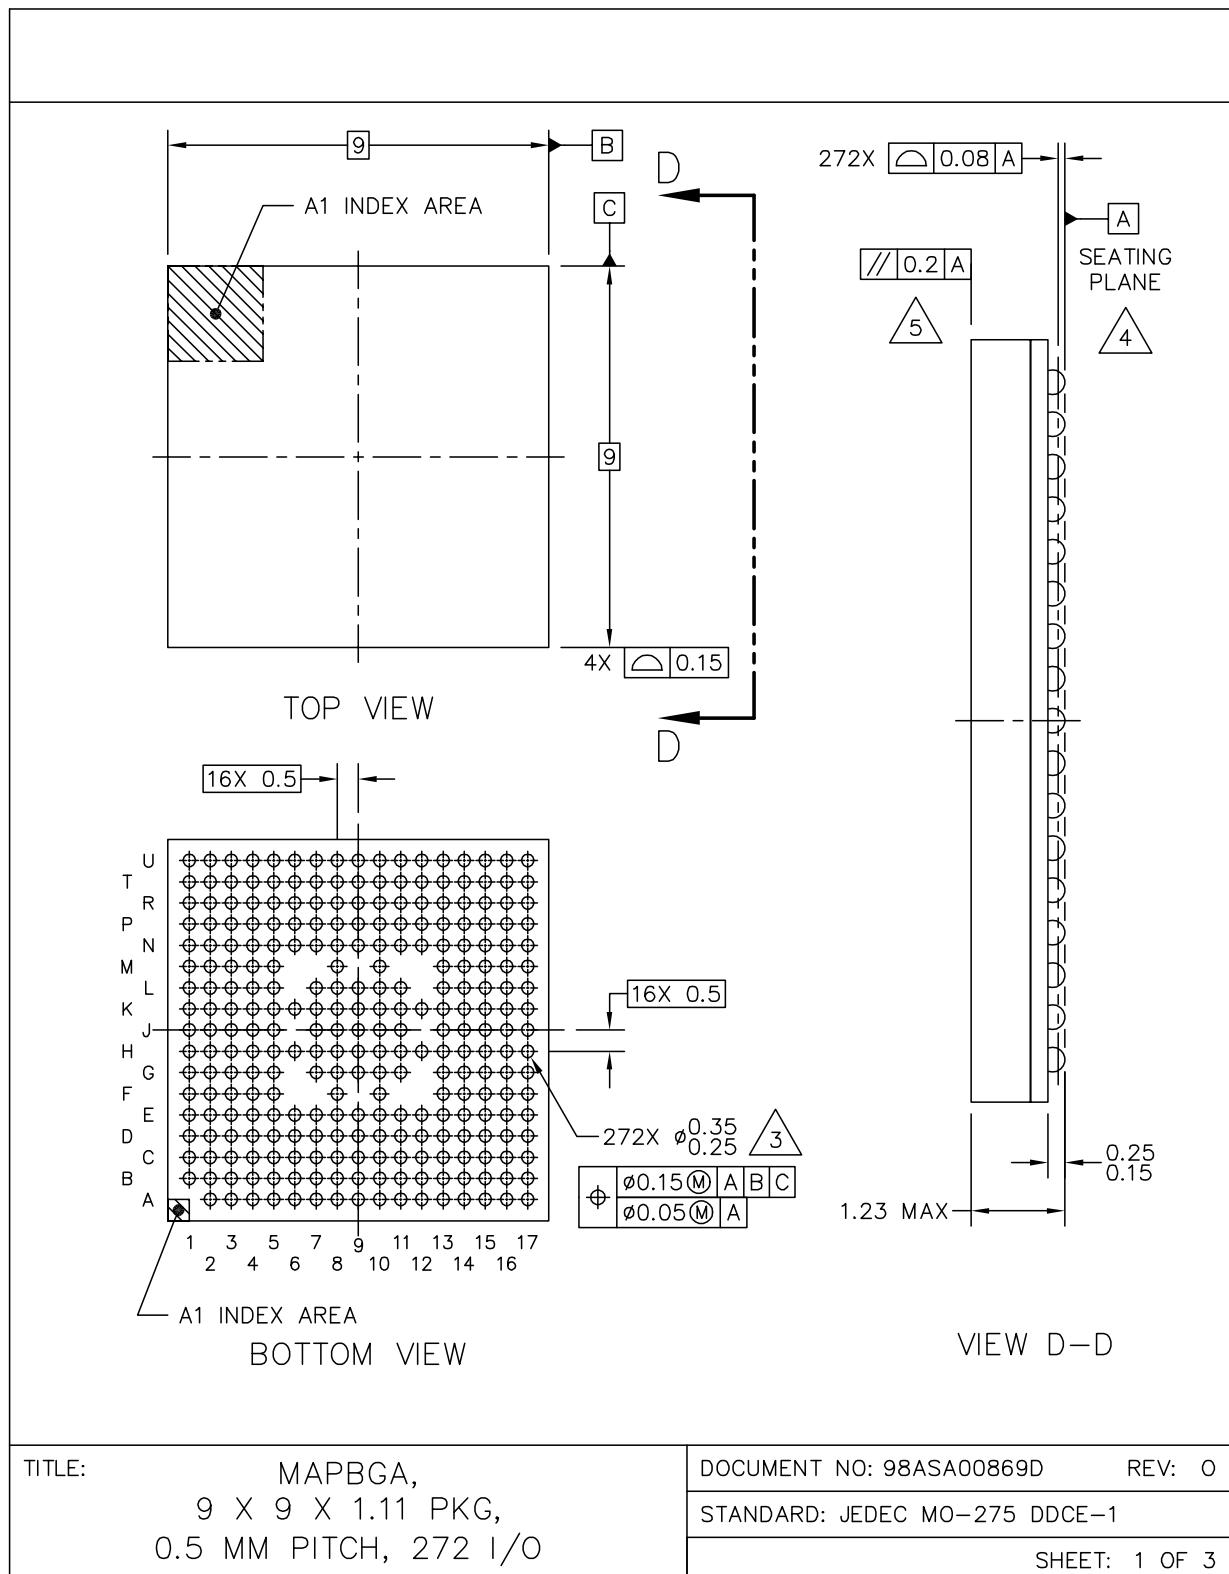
9 x 9 mm BGA, Case x Package Top, Bottom, and Side Views
